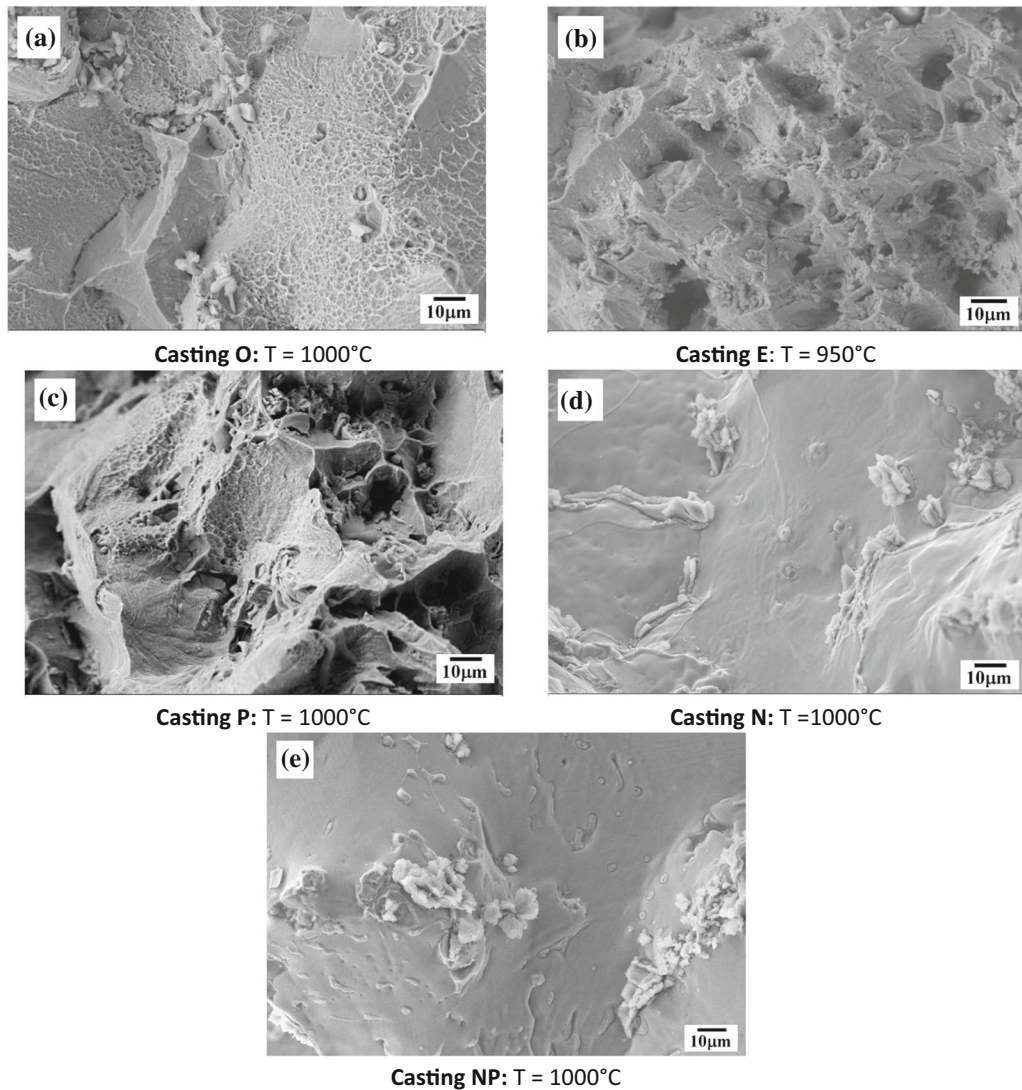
Fracture surface of on-cooling samples. (a) casting O, (b) casting E, (c) casting P, (d) casting N, and (e) casting NP.
